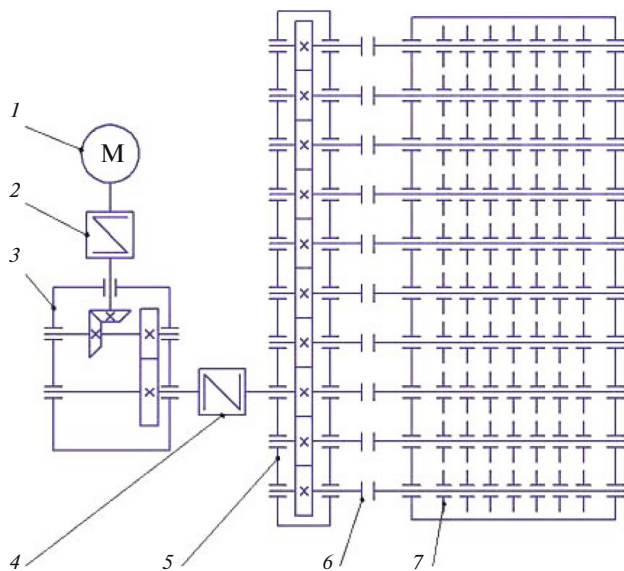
Kinematic diagram of the drive for the coke sorting stands: (1) electric motor; (2) protective clutch; (3) conical–cylindrical gear system; (4) gear-type coupling; (5) gearbox; (6) equalizing coupling; (7) stands.
